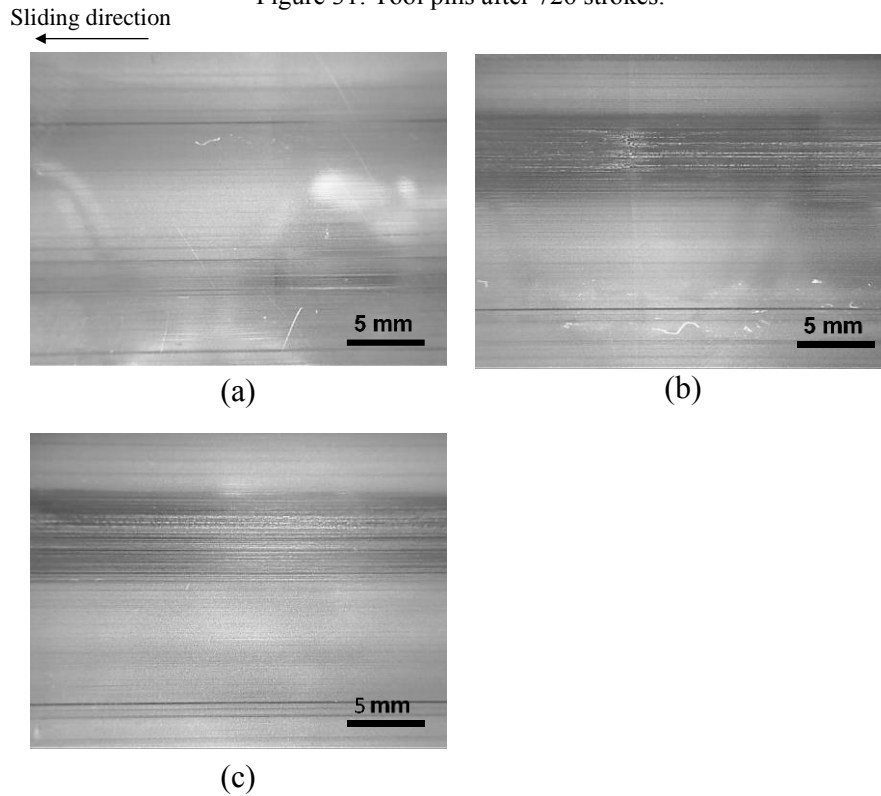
Surface structure of the ironed strip after (a) 38 strokes (b) 495 strokes (c) 722 strokes. The drawing direction is from right to left.
